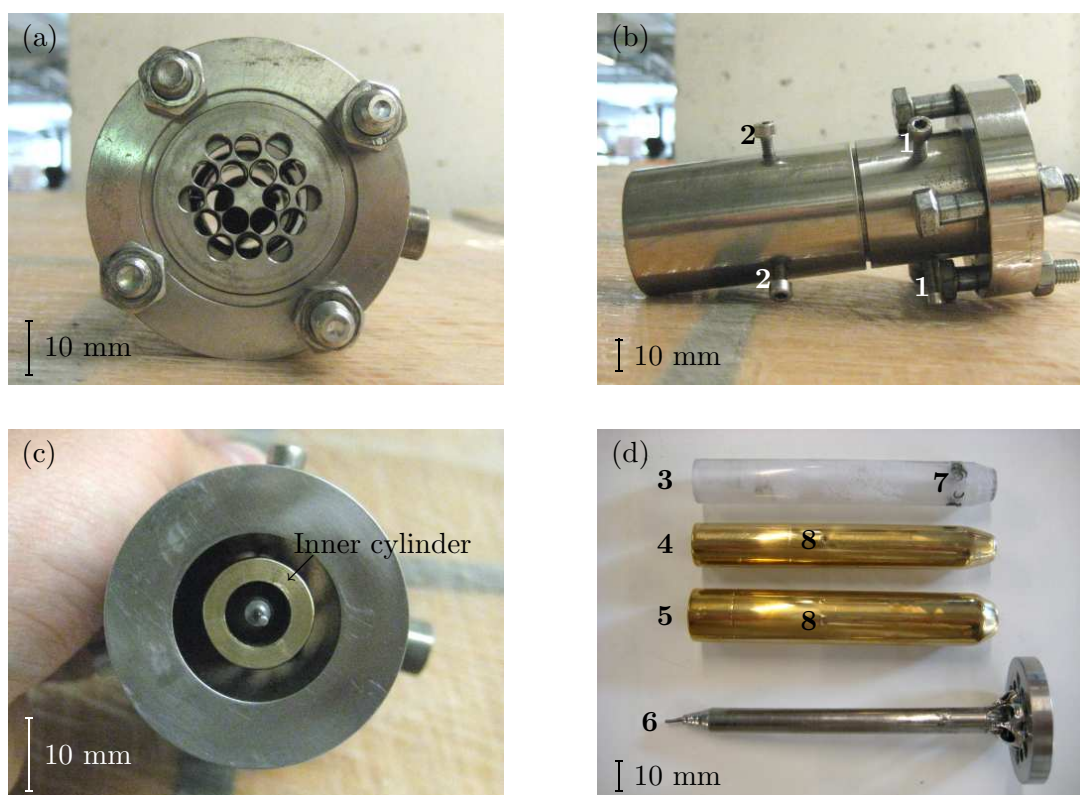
Close-up pictures of the extruder head. (a) Front-view of the extruder head. The material is pushed through the small holes and past the inner cylinder behind the holes. (b) Side-view of the extruder head showing the adjustment screws used to keep the inner cylinder in place. The old screws are labeled '1', and the new screws are labeled '2'. (c) Back-view of the extruder head. The SiC-clay is forced through the gap between the extruder head itself and the inner cylinder, thereby forming a monotube. (d) The old plastic inner cylinder ('3') is shown together with the two new brass inner cylinders ('4' and '5') and the cylinder rod ('6') on which the inner cylinders are placed. Marks from the old adjustment screws ('7') is seen on the plastic inner cylinder, while marks from the new adjustment screws ('8') is seen on the brass cylinders.
